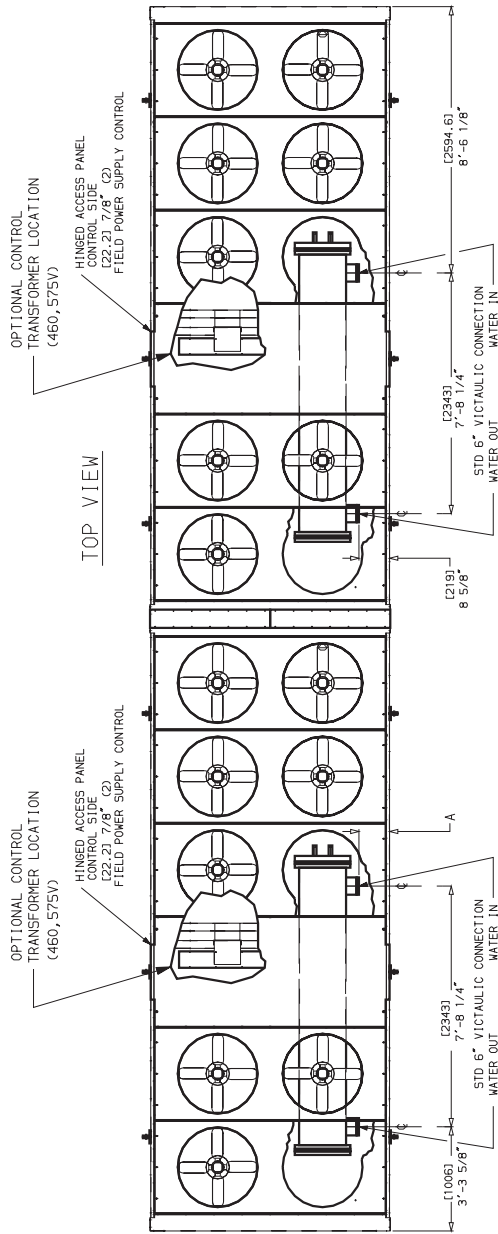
Dimensions, Unit Sizes 290, 315 (A/B Modules Shown Connected with Accessory Trim Kit)
